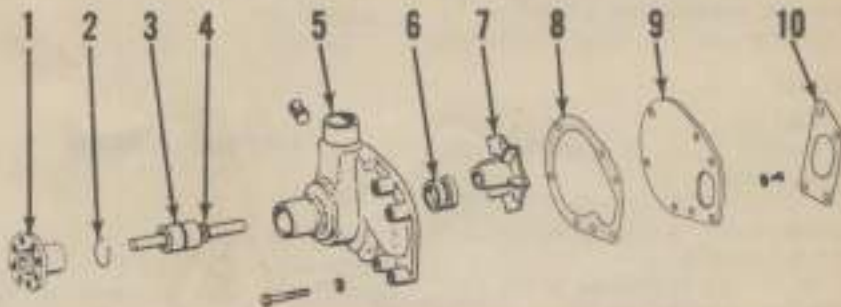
Exploded view of water pump used on late D-17 diesel models.
